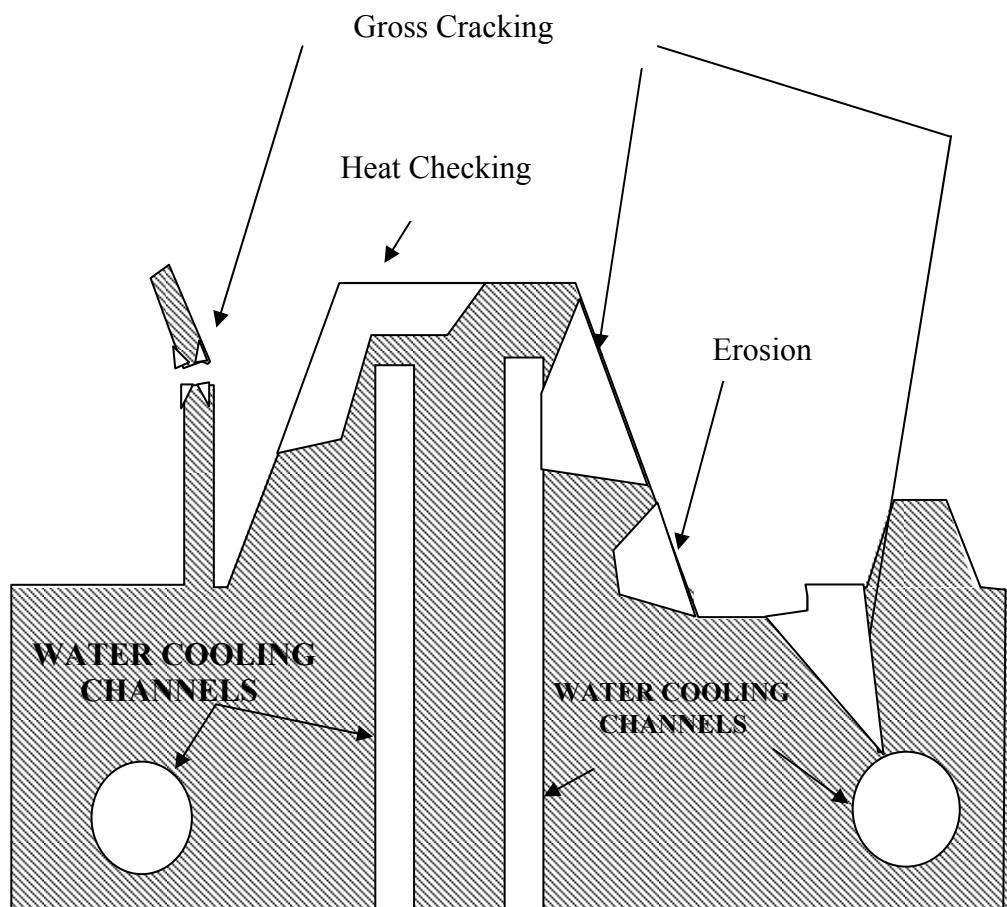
Schematic representation of weld surface preparation for each die failure area
